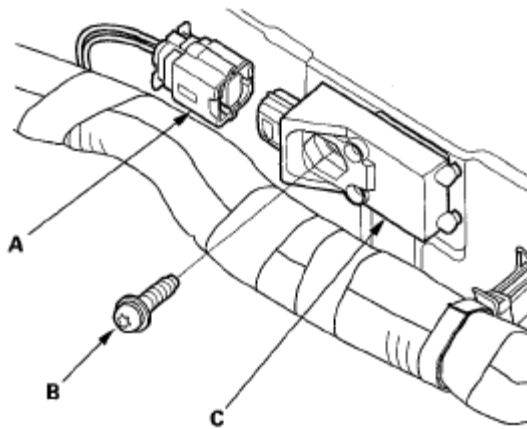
Identifying Floor Wire Harness 2P Connector And Roll Rate Sensor
